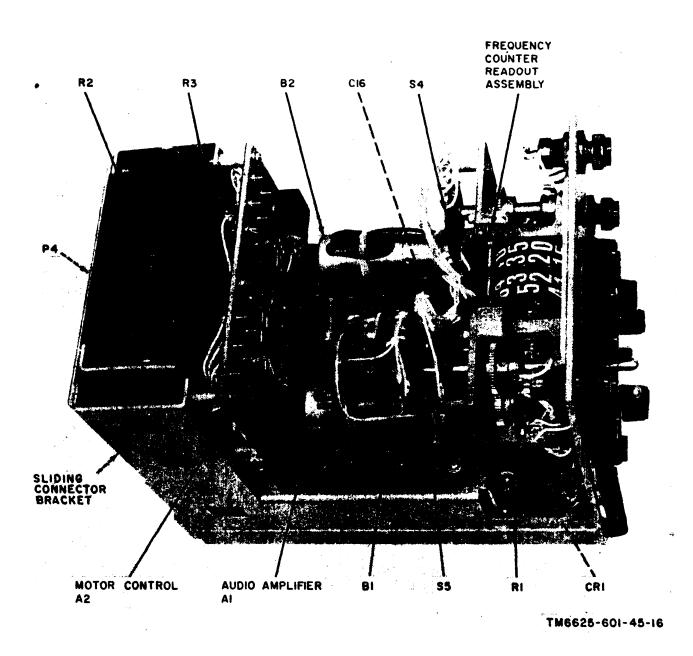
Simulator-Test Set SM-349/ARC-54, inside view, parts location.
